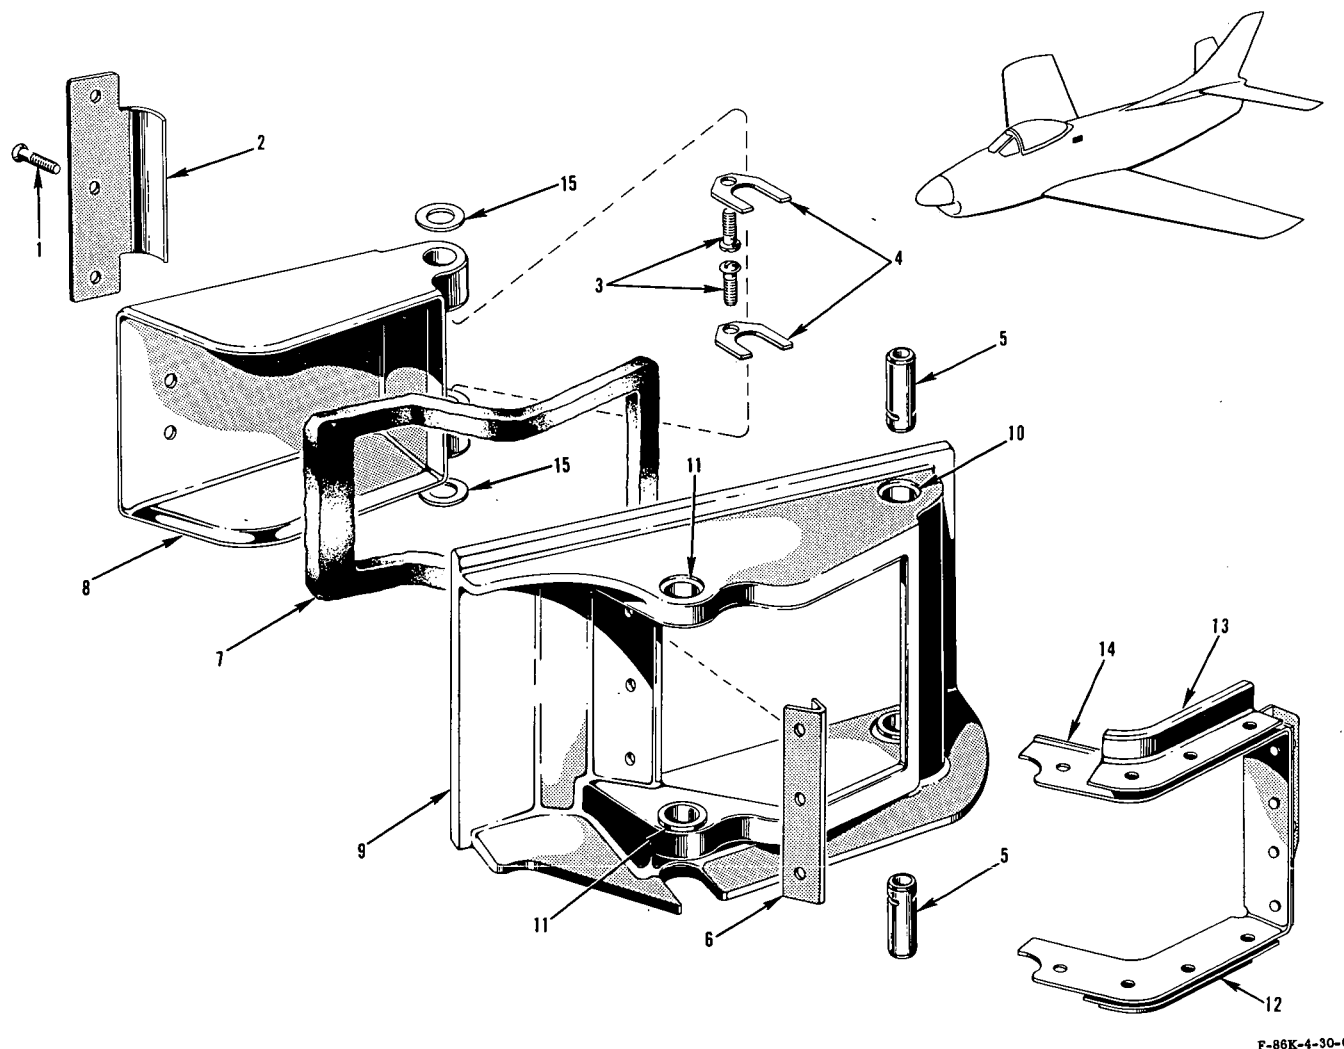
HEAT AND VENT SYSTEM COOLING AIR DOOR ASSEMBLY
